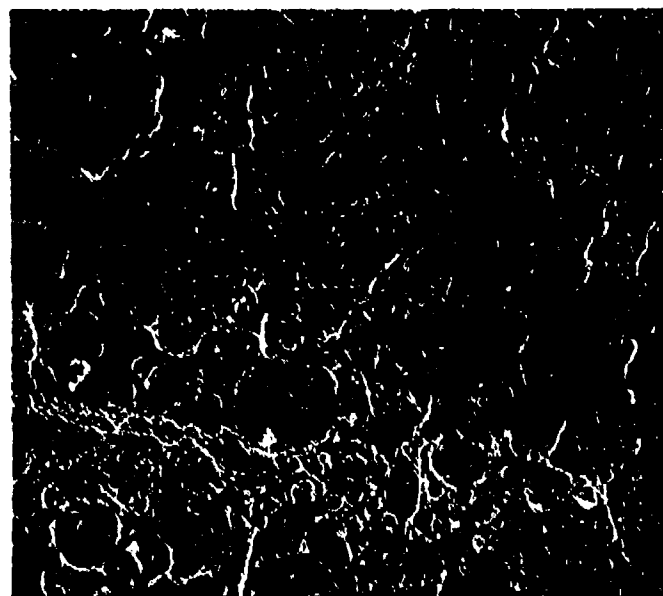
Fatigue fracture surface of A-514 weldment containing LOP, 650x.
